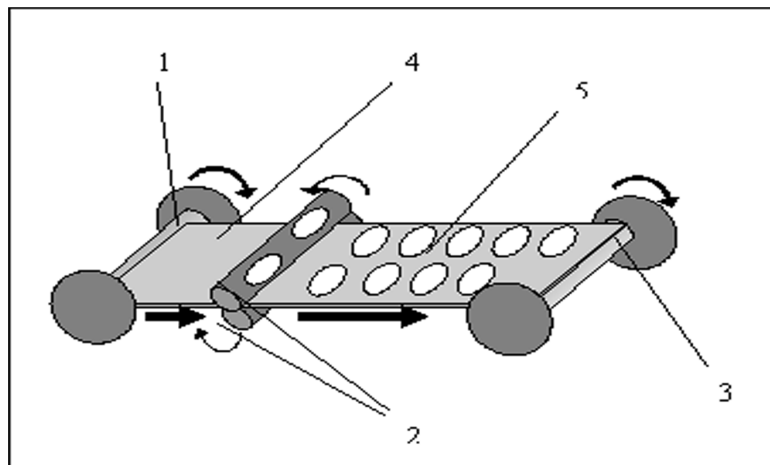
Scheme of operating principle of damping gaskets fabricating machine tool
